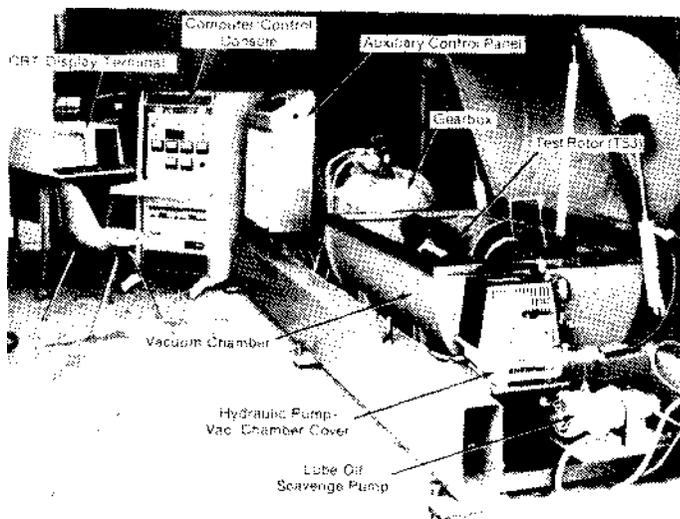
Prototype high-speed balancing system for U.S. Army helicopter engines
